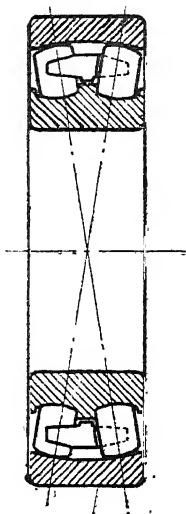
The double-row self-aligning barrel-roller bearing.
